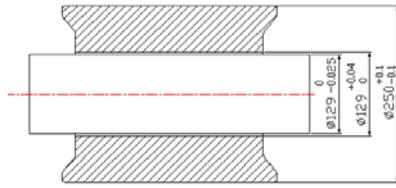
allow the upper half of the roller assembly gap Figure.12 large diameter mandrel assembly dimension chain
